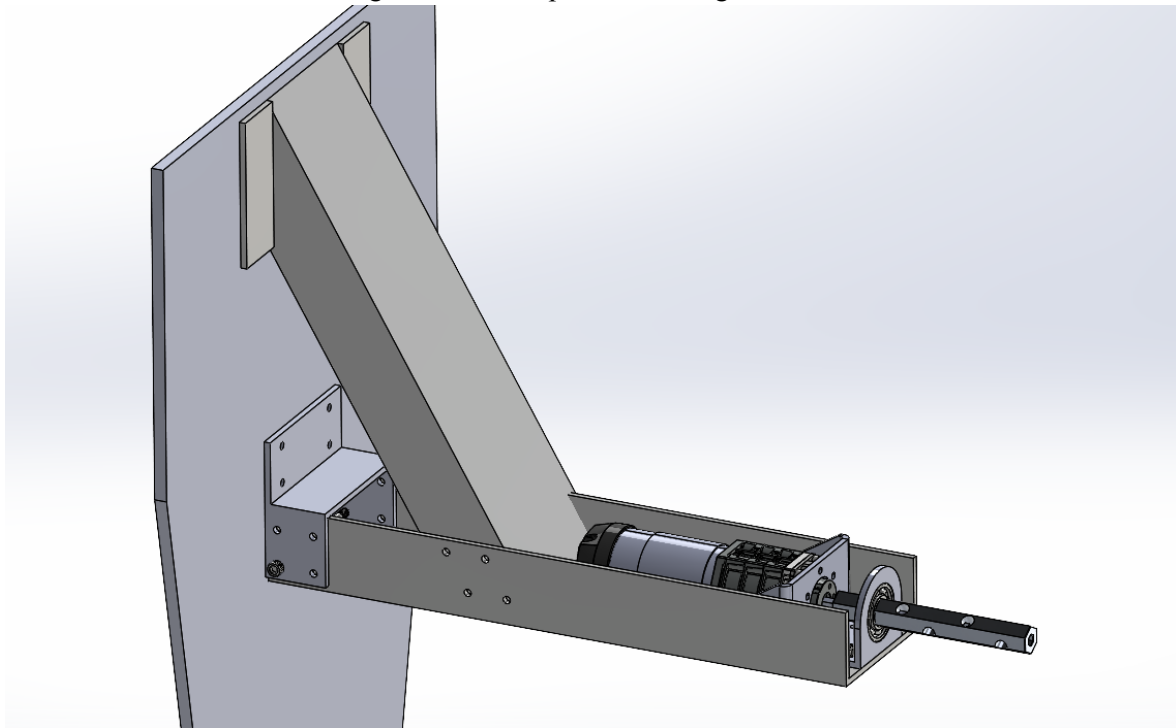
Close-up view of the arm and target interface, including the aluminum u channel "bicep", brackets, and motor and bearing mounts.
